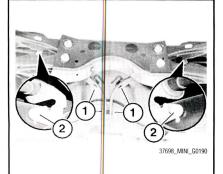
Disengage parking brake Bowden cables from holders (1) and feed out through rear axle carrier
